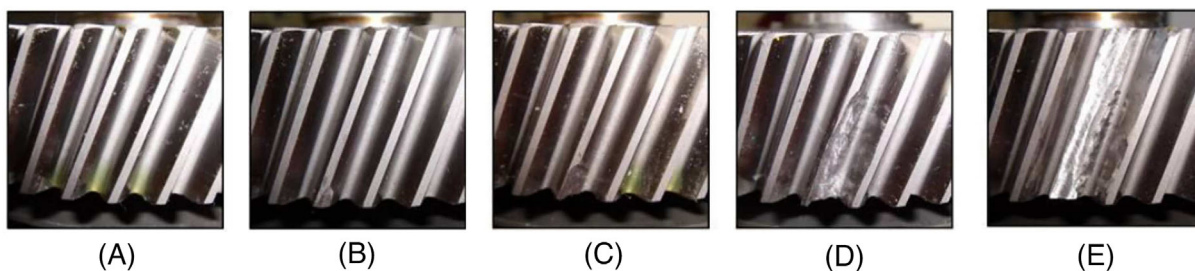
Gearbox pinion conditions investigated during the seeded-fault tests: (A) healthy (H), (B) 3 mm × 2 mm chip (F1 Gear), (C) 7 mm × 5 mm chip (F2 Gear), (D) 18 mm × 6 mm chip (F3 Gear) and (E) missing tooth (F4 Gear).³⁴
